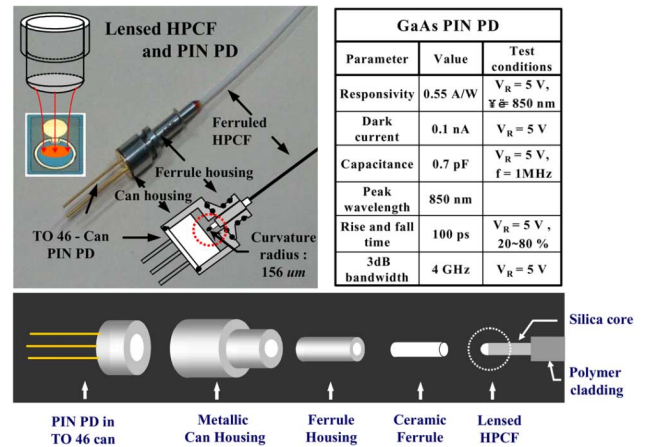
Exploded diagram showing the different parts of the assembly of a pigtailed PIN PD and PD specification.
